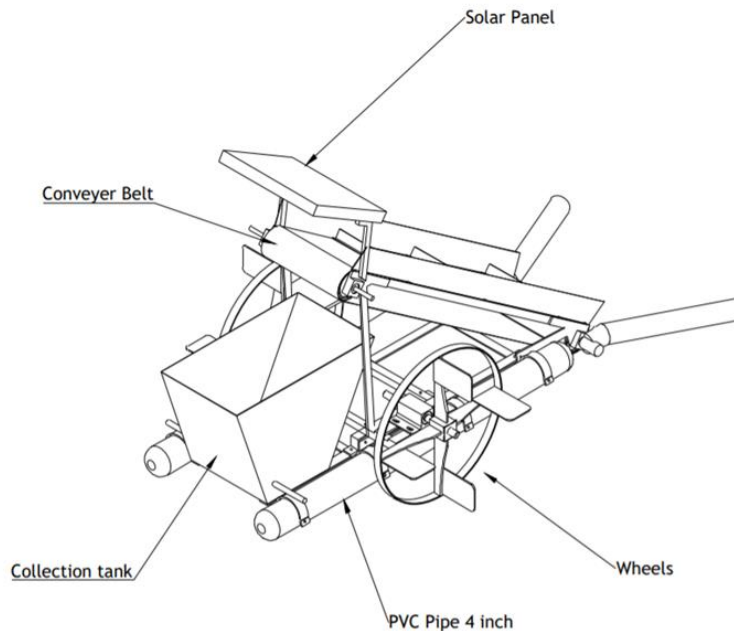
Constructional Model of Trash skimmer boat in Isometric view
